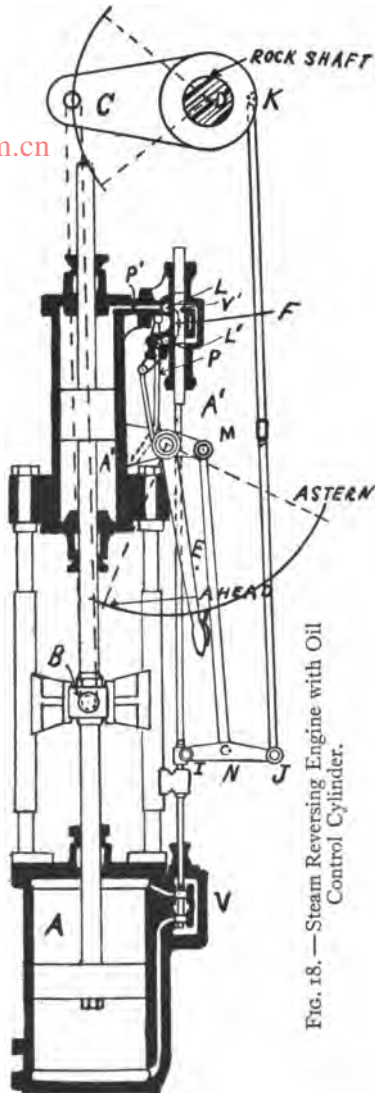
Steam Reversing Engine with Oil Control Cylinder.
